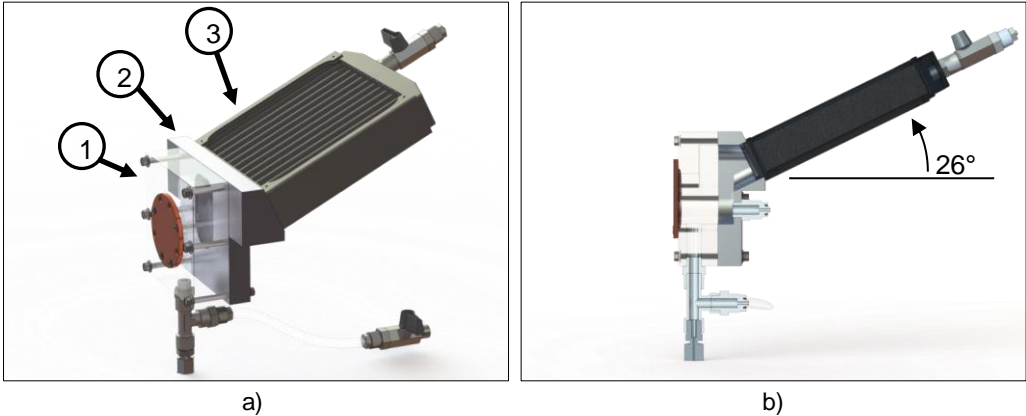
Vertically oriented prototype final design. [a) Perspective view b) Midsection view. (CAD model)]
